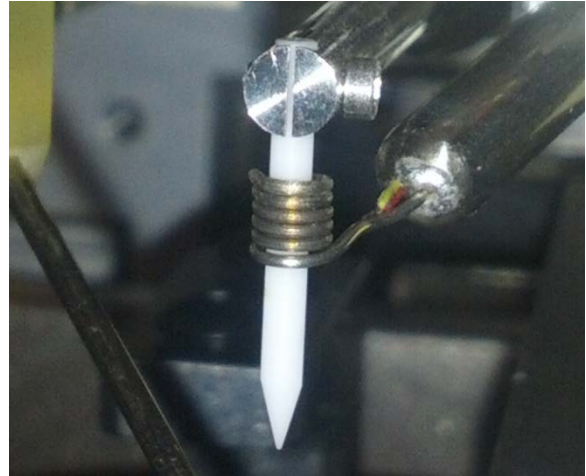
Tool Heater Coil Surrounds and Heats Wire Bond Capillary.
